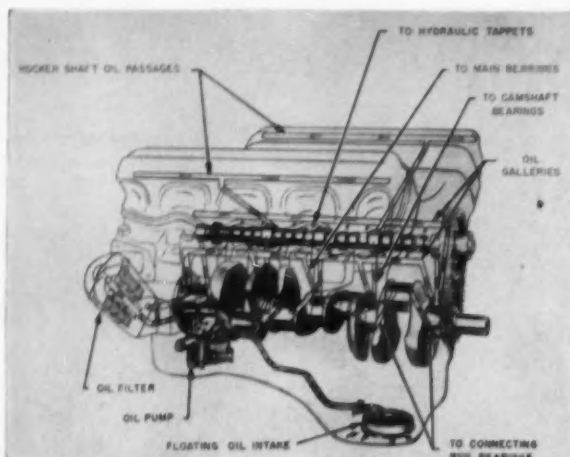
Lubrication system is the same, basically, that has been used on the Chrysler, DeSoto, and Dodge V-8 engines.
